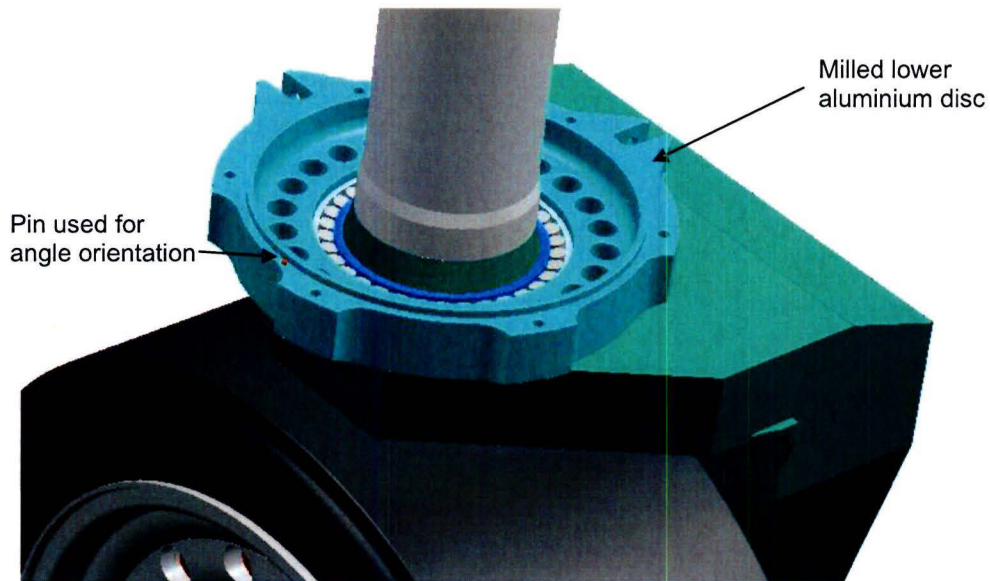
"Milled lower aluminium disc", with pin (red), mounted to the bearing
